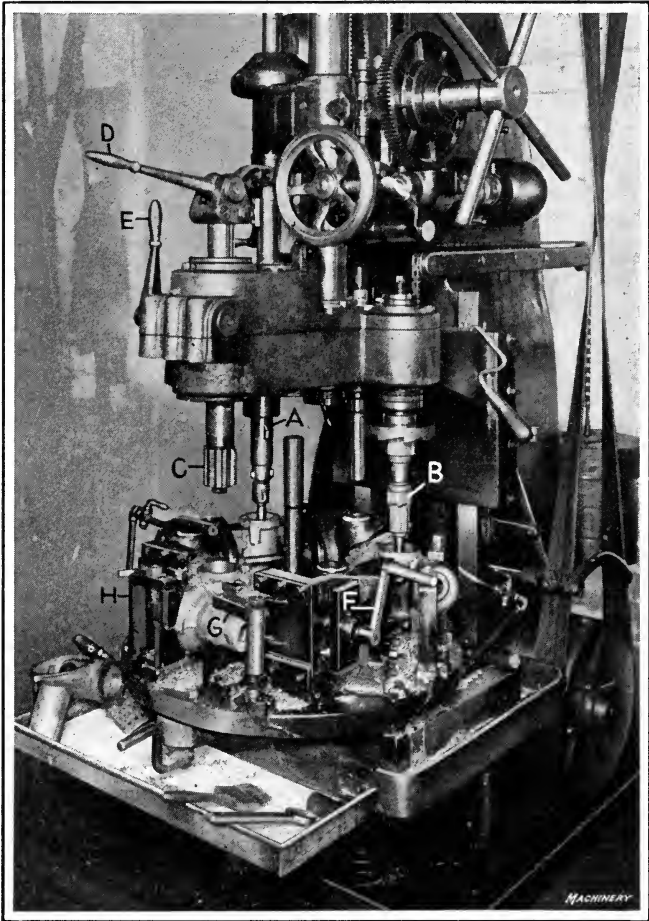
High-duty Drilling Machine with Indexing Fixture and Three-spindle Head for Boring and Reaming Three Holes, Facing Two Surfaces, and Tapping One Hole
